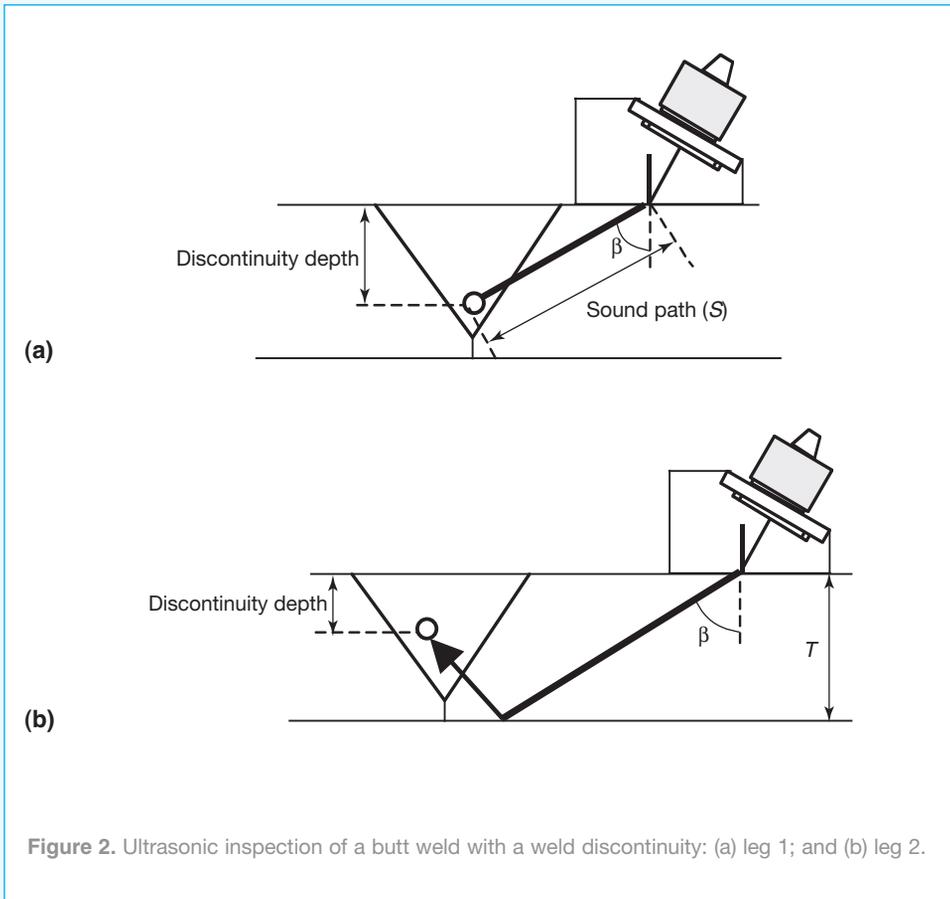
Ultrasonic inspection of a butt weld with a weld discontinuity: (a) leg 1; and (b) leg 2.
